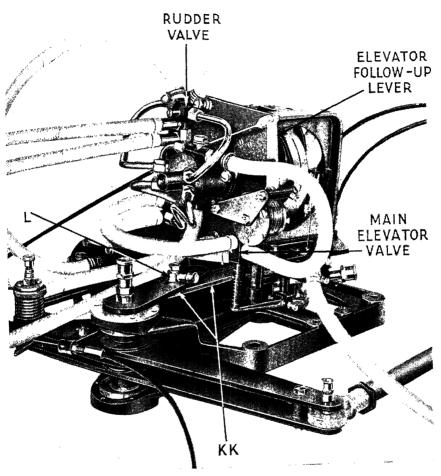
RUDDER AND ELEVATOR CONTROL UNIT Showing the main elevator valve and rudder follow-up_ratio arms.
